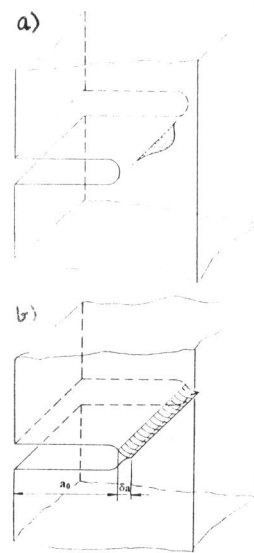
Cracks ahead of the notch tip: a) half penny, b) straight through edge crack
